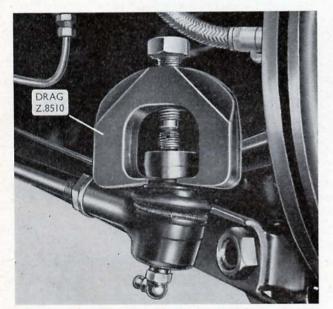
Drag positioned prior to disconnecting a steering connecting rod ball joint
